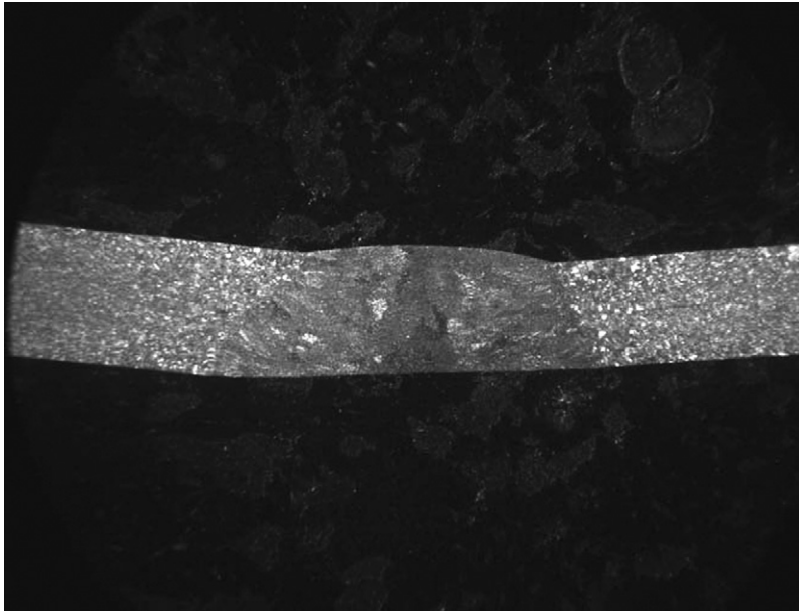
Ferritic stainless steel weld showing large grain size in the weld and heat affected zone.
